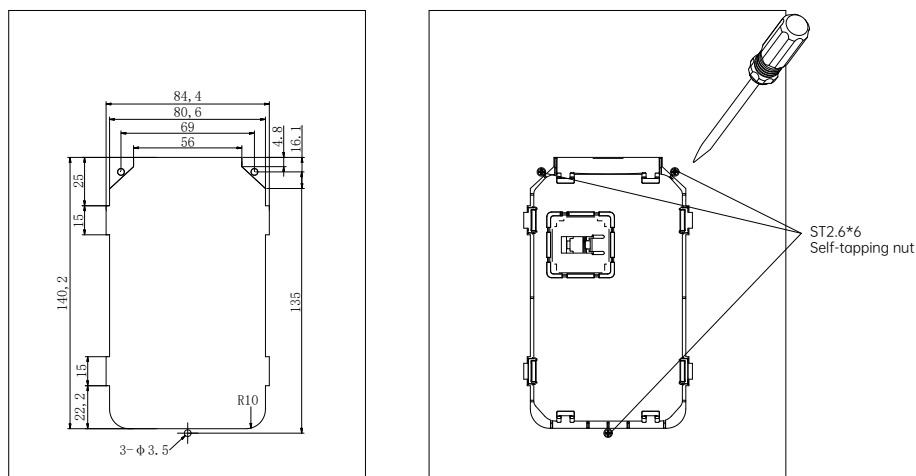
Mounting hole dimensions for large operating panel fixed base (unit: mm)
